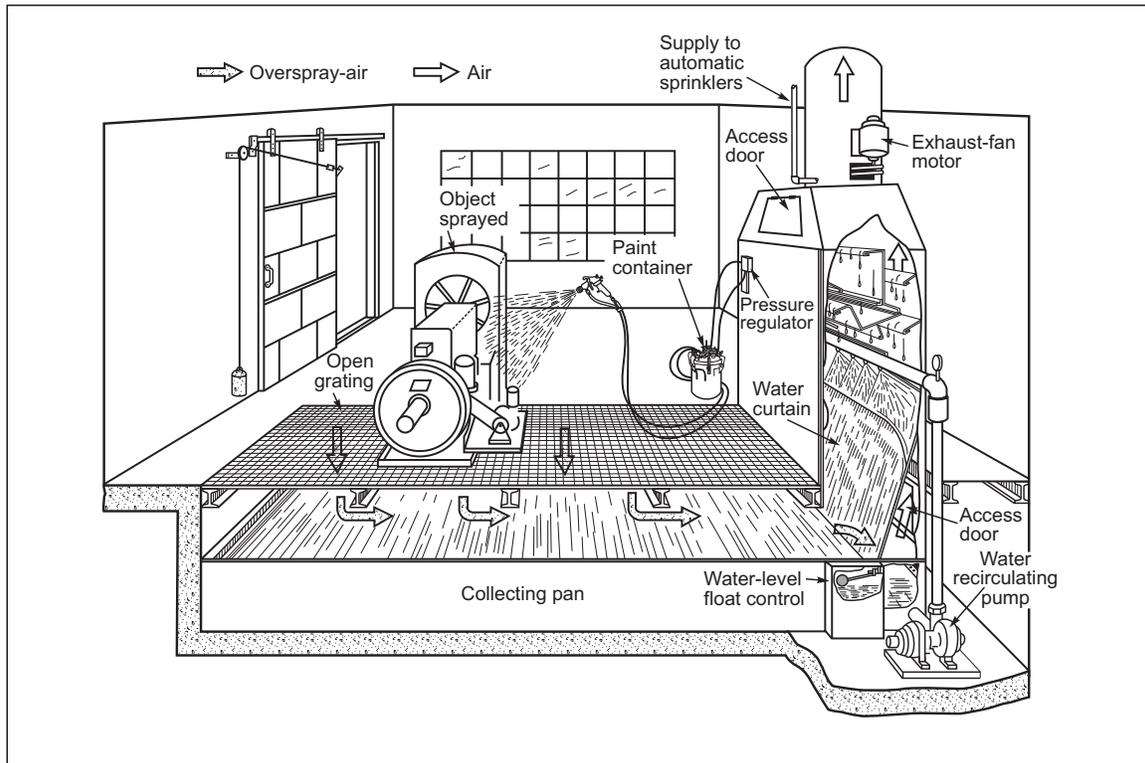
Downdraft water wash spray booth (room sprinkler system not shown)
